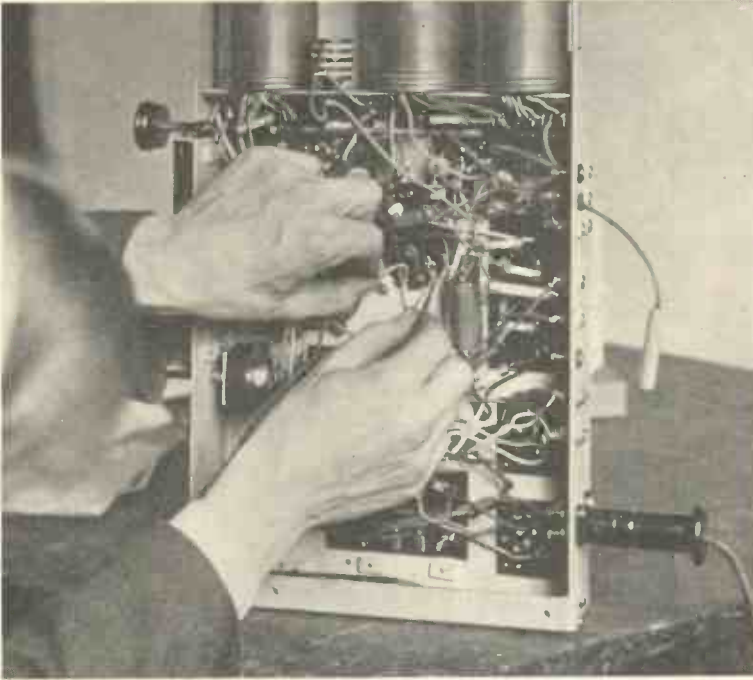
TESTING THE INTERVALVE TRANSFORMER.
